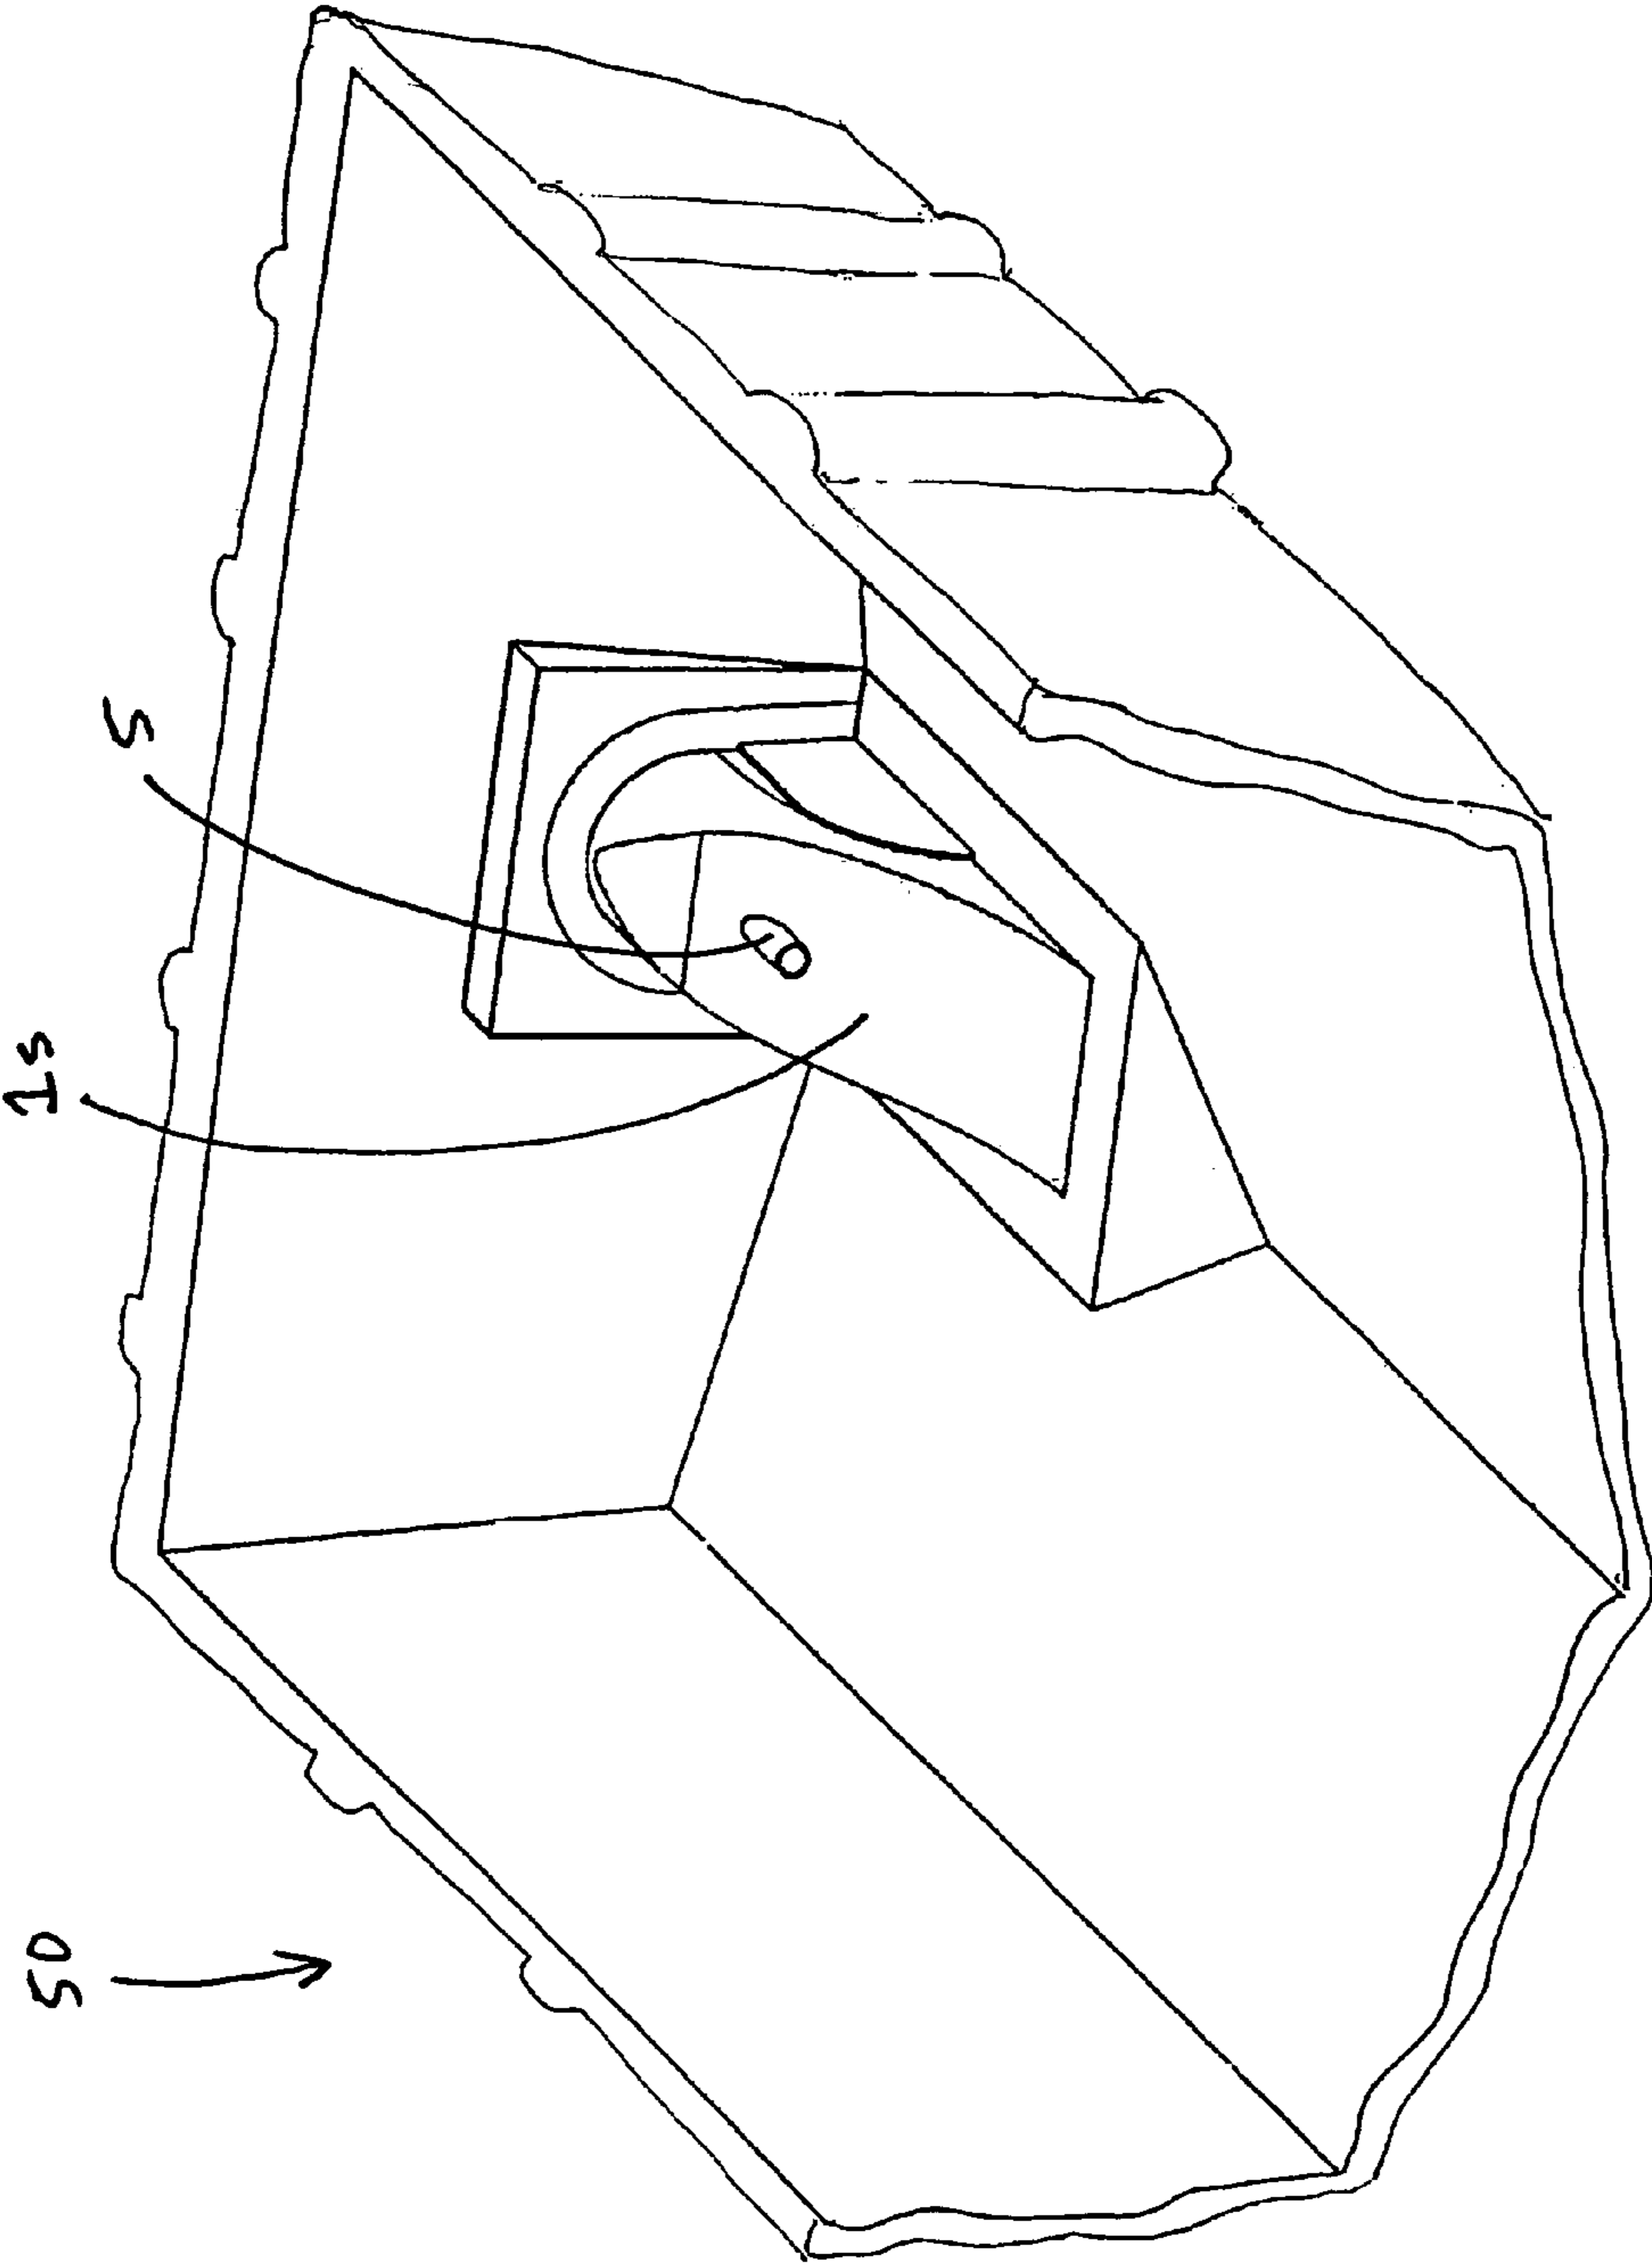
INTAKE DUCT SHELL ASSEMBLY PLACED IN VESSEL MOLD
